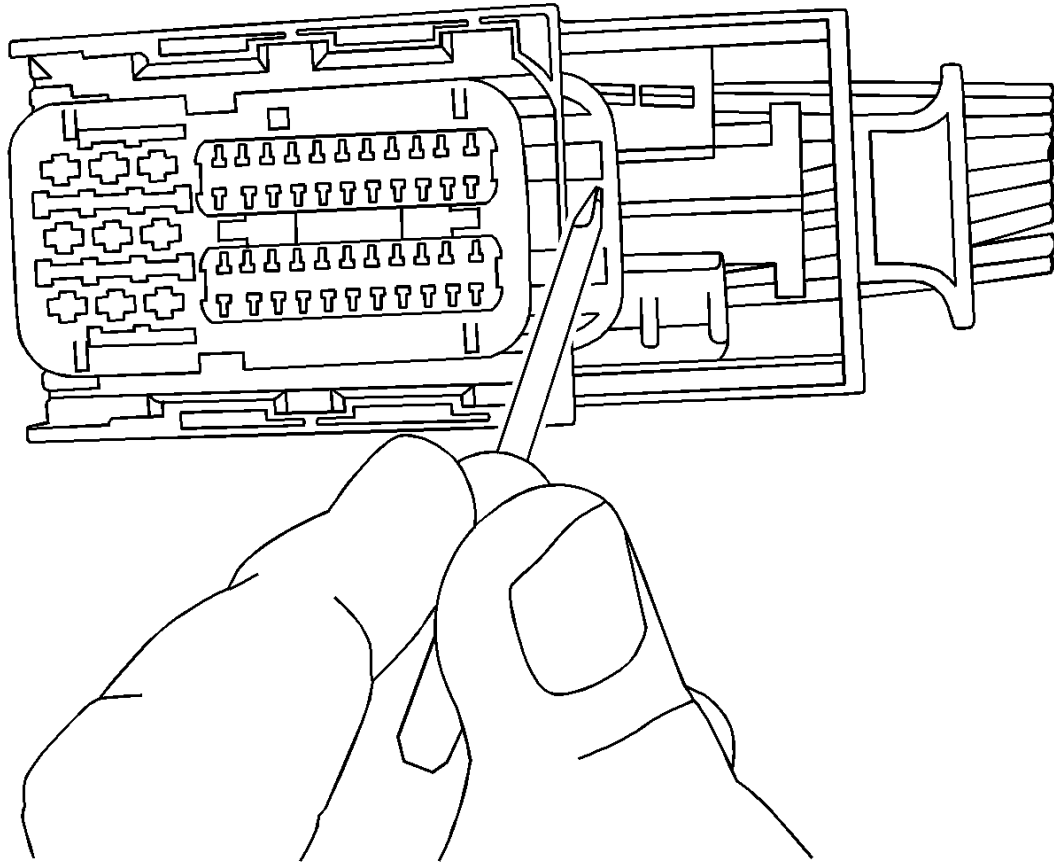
Using Small Flat-Blade Tool To Remove Rear TPA
